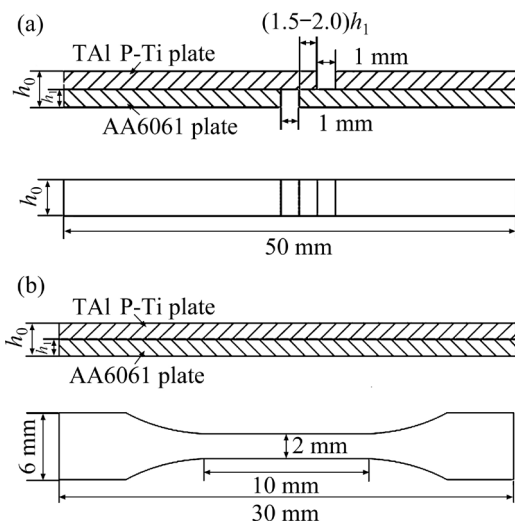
Specimen dimensions for mechanical property test: (a) Shear specimen; (b) Tensile specimen
